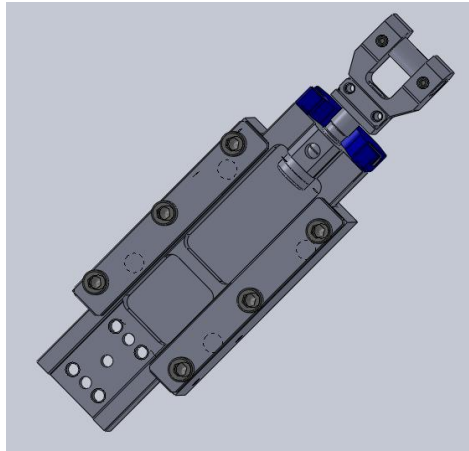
SPONSOR-PROVIDED ASSEMBLY.
